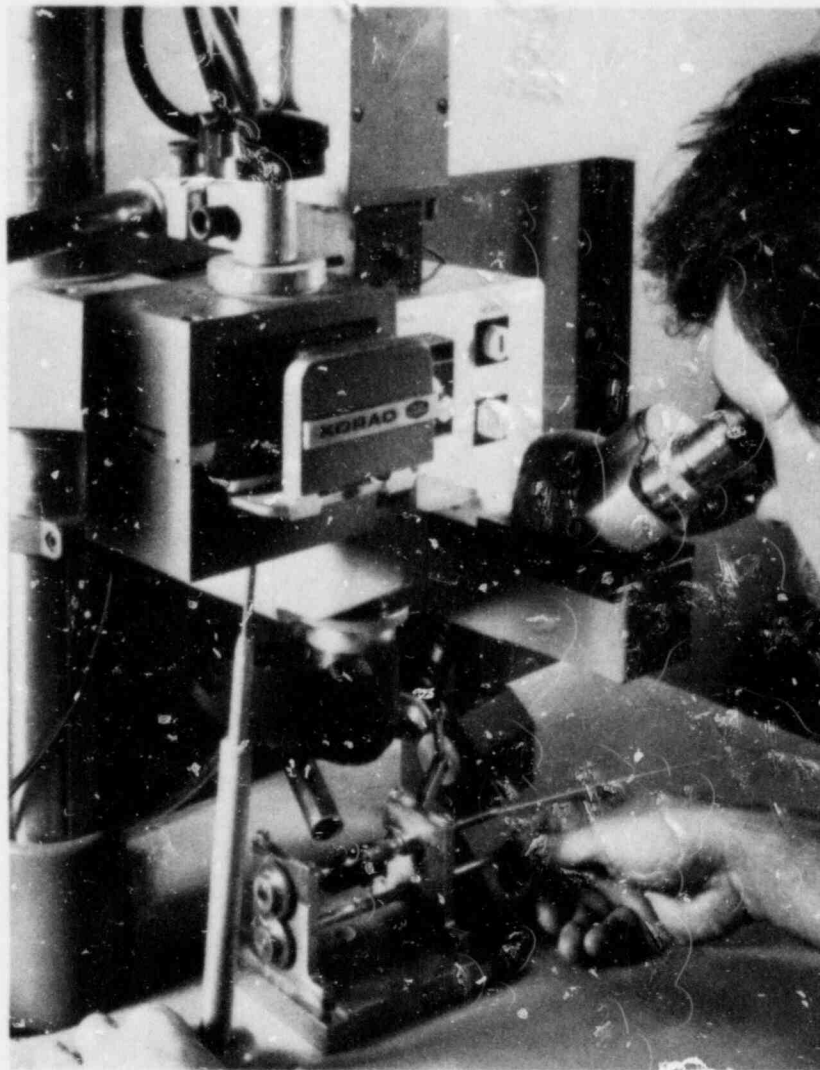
Laser welding of type 304 stainless steel central conductor to platinum extension wire.
